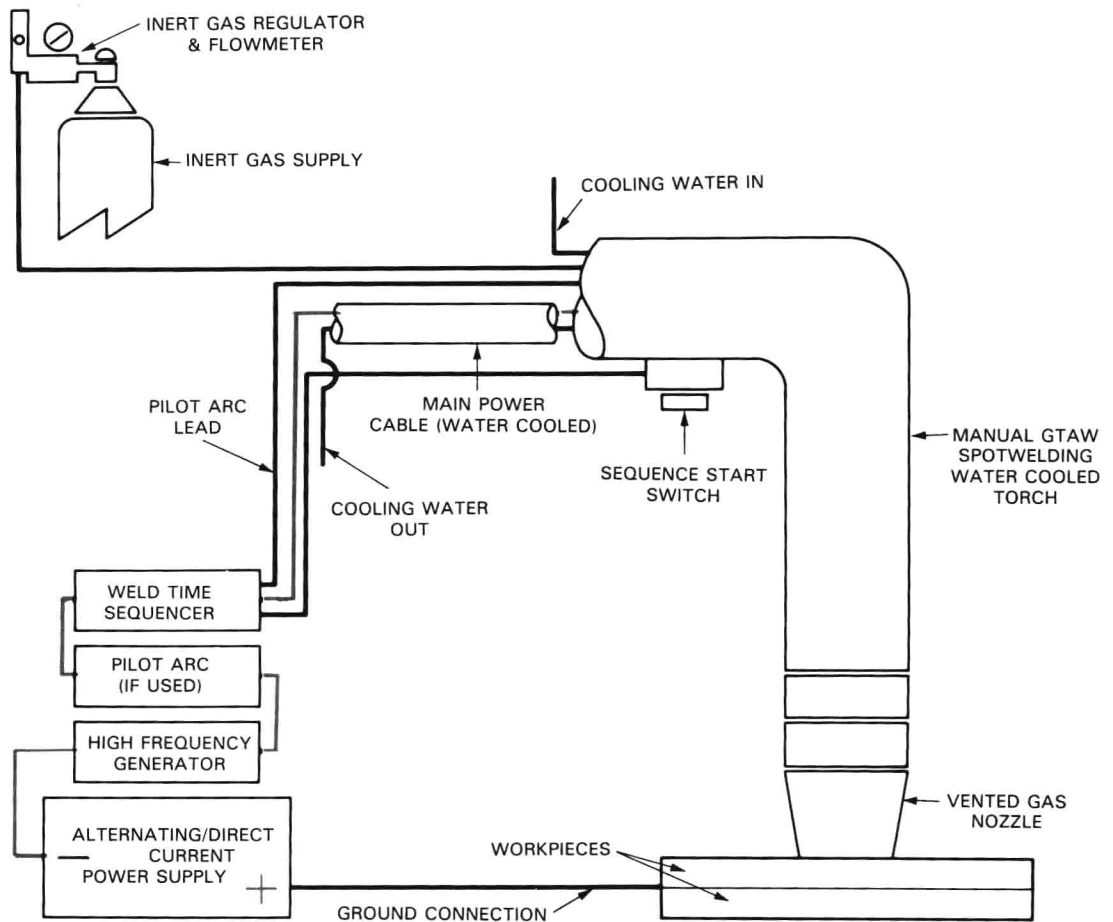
Spot welding of overlapping materials is accomplished by heating the top plate and melting into the bottom plate.
